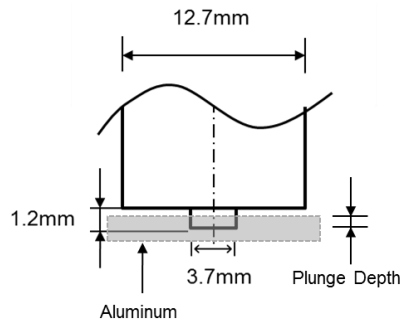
Illustration of FSSW tool dimension and the definition of the plunge depth
